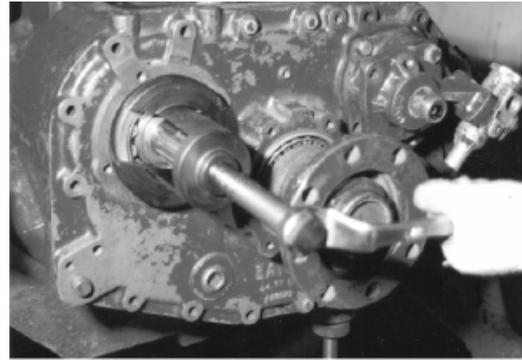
Pull The Countershaft Bearing of Secondary Transmission by Using Extractor
